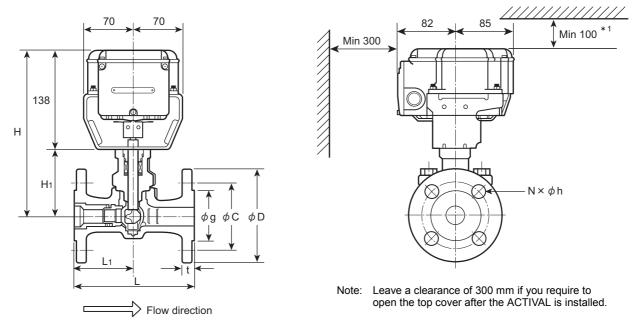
Dimensions (mm): Valve body (JIS FCD450)
